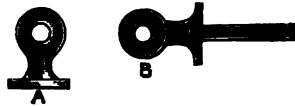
PISTON ROD, WITH DRILLED KNOB.
